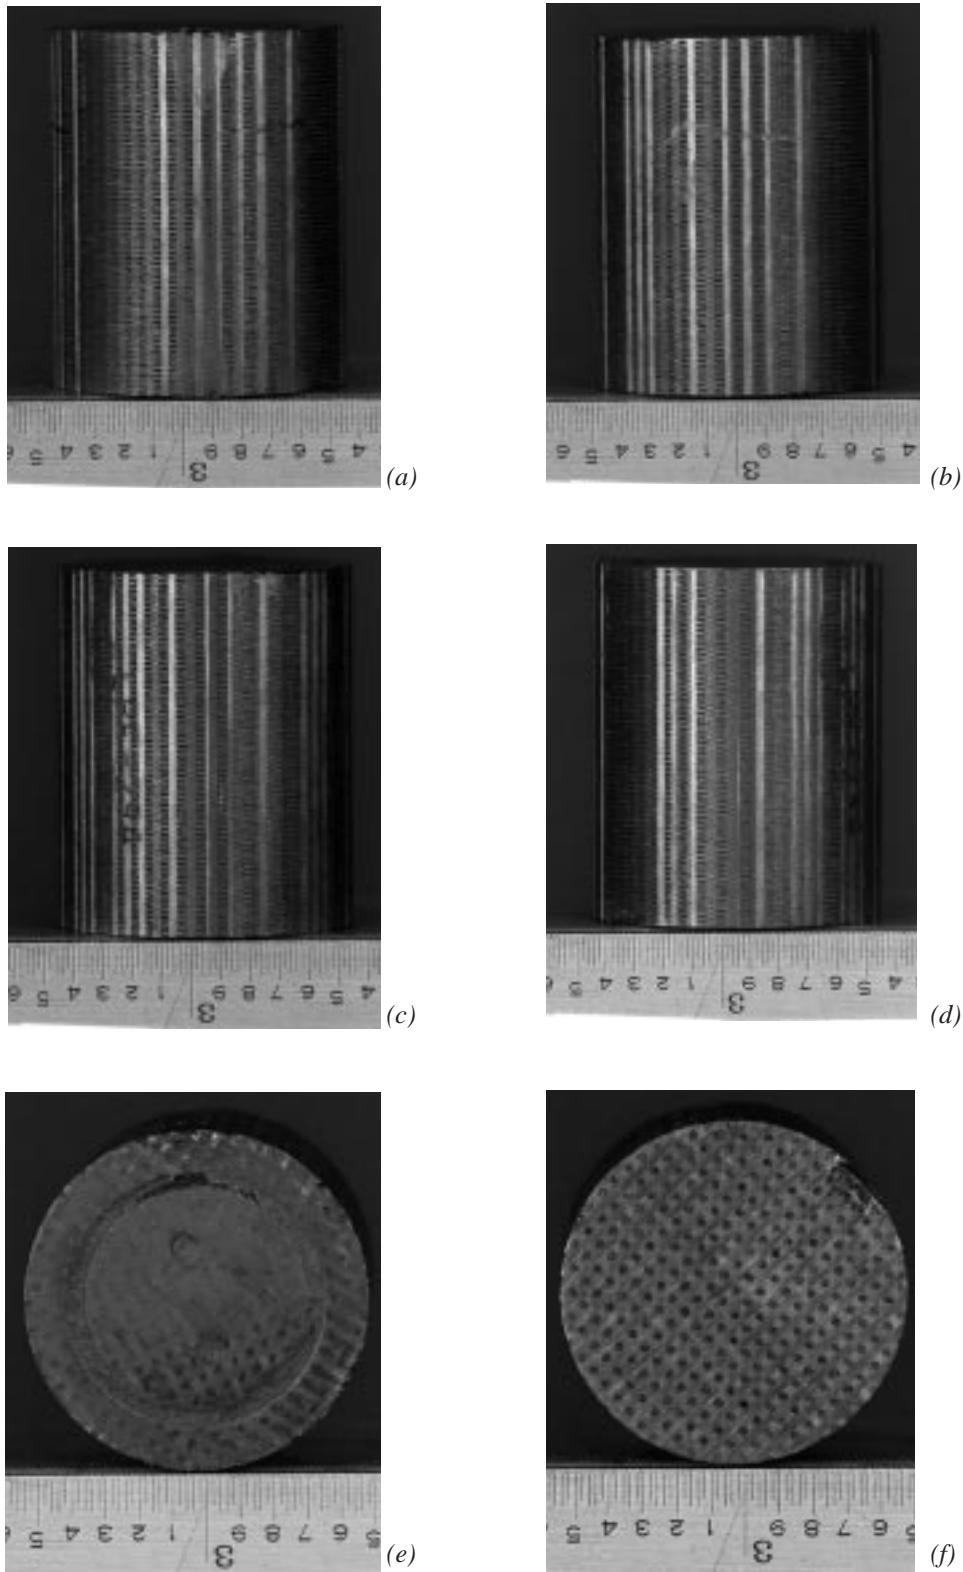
Impacted LRF-294 aeroshell: (a) impact face; (b) profile, 90 deg; (c) trailing face; (d) profile, 270 deg; (e) end cap; (f) blind end.
